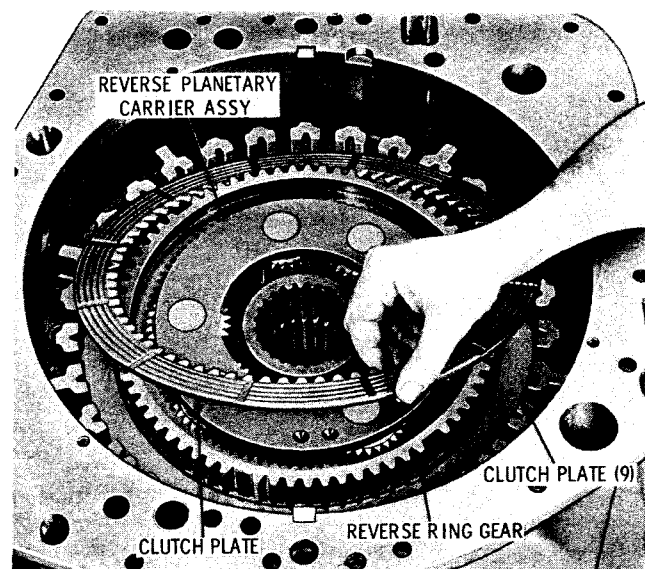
Installing reverse clutch internal-splined plate (5631 models)
